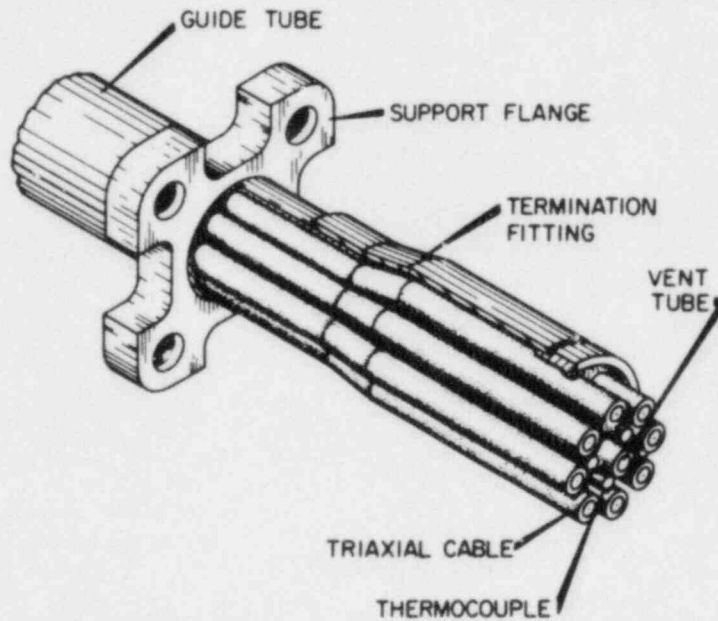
Upper rod termination of an instrumented guide tube assembly. All the joints are brazed simultaneously in a resistance-heated furnace with a commercial nickle-based filler metal ( $B_2Ni-3$ ). The support flange is tack-welded in place after brazing.
